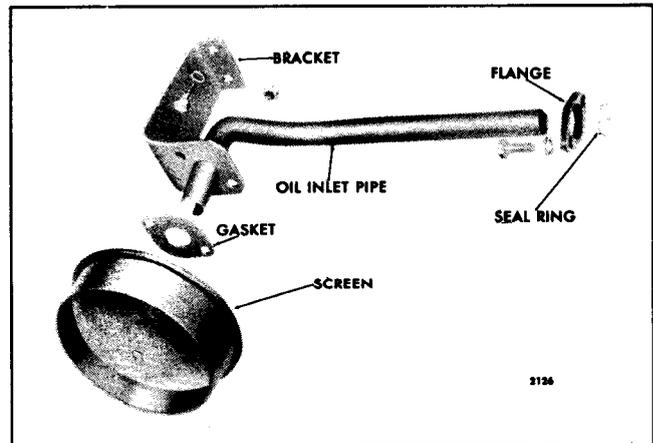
Oil Pump Inlet Pipe and Screen Details and Relative Location of Parts (In-Line Engine)
